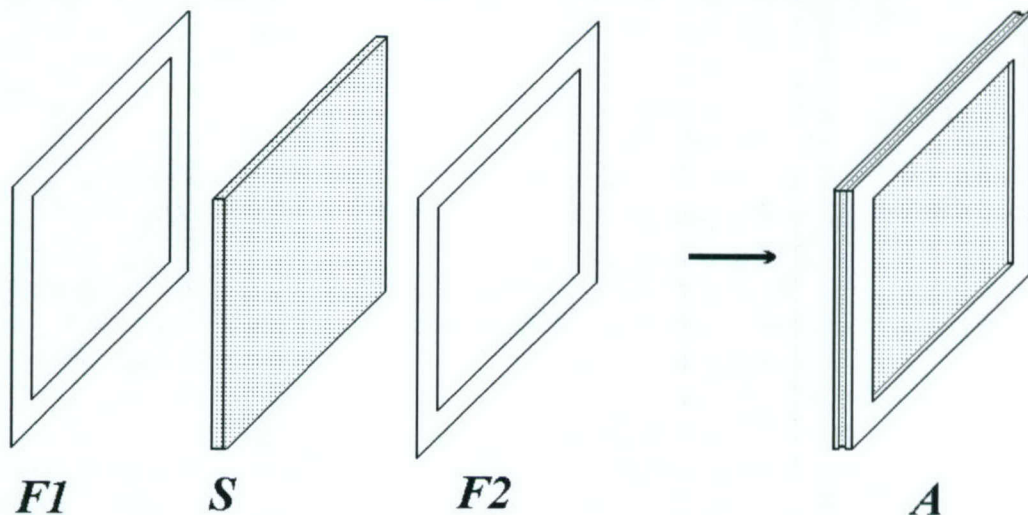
Assembly of the sample set-up. F1 and F2 - frames, S - sample (coupon), A - completed assembly (bolted).
